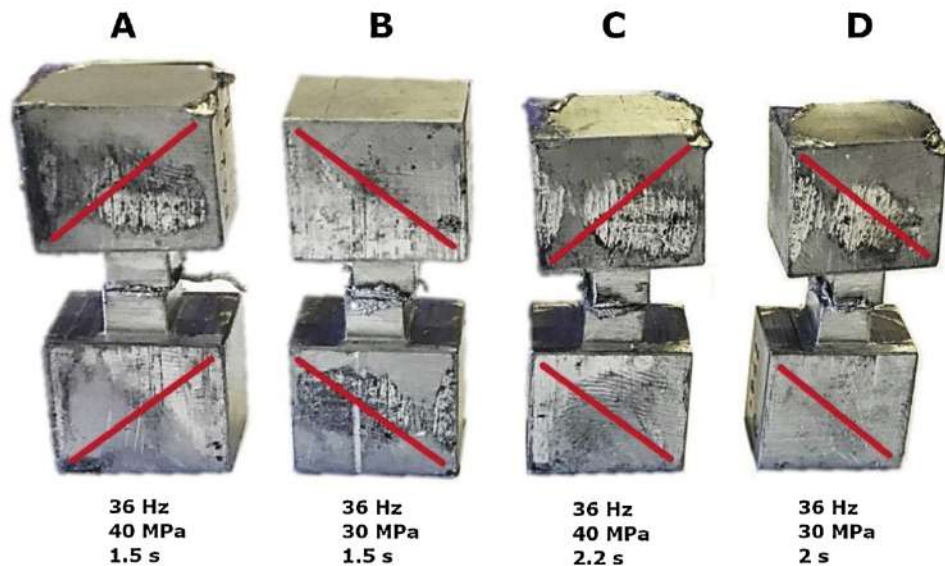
Weld's configuration with marked in red shearing plane position, together with LFW process parameters.
